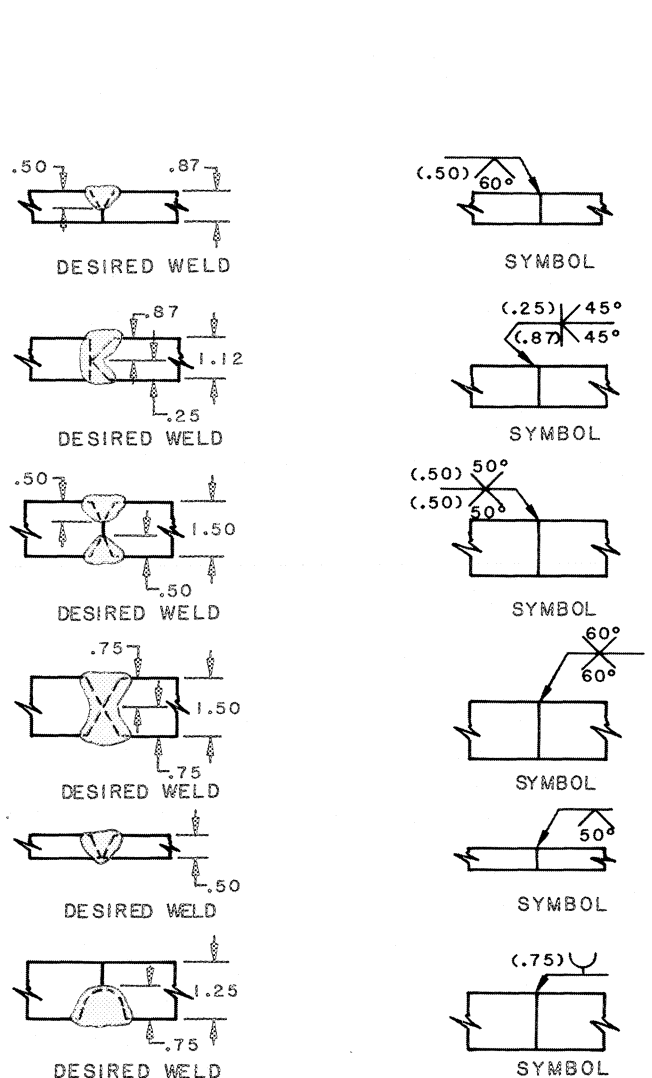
Designation of Size of Groove Welds with No Specified Root Penetration
